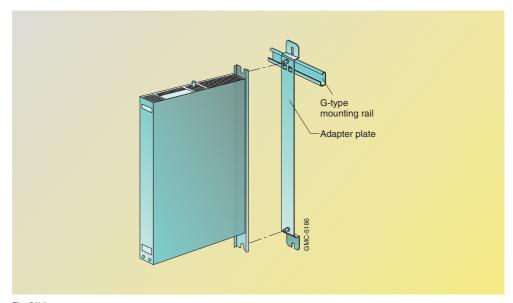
/14 Adapter plate 6SX7010–0KC01 is required for mounting on G-Type rail for size S newer type braking units
